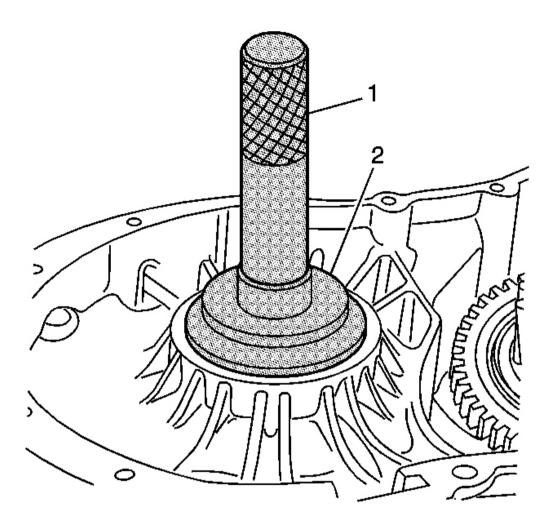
Installing Left Differential Bearing Race Courtesy of GENERAL MOTORS CORP.
